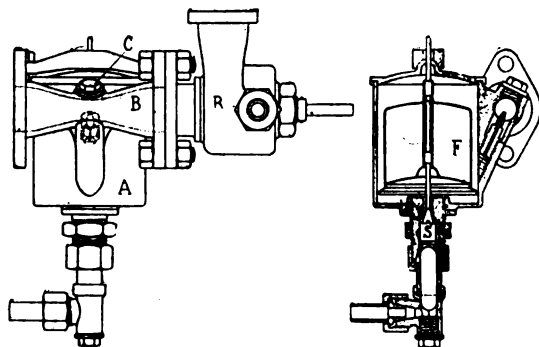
and 9.—General View and Transverse Section of Grouvelle-Arquembourg Carburettor.
